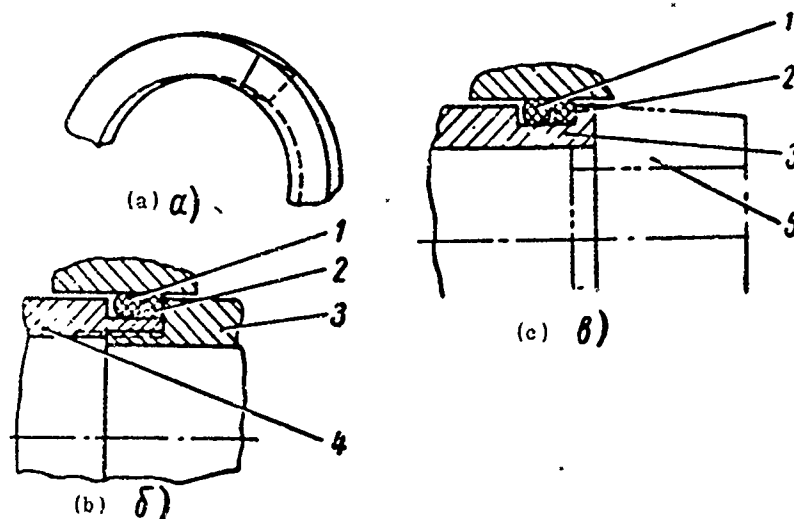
Methods of installing safety washers: a - cut teflon ring (with oblique cut); b - releasable connection; c - installation of guard ring by deforming it; 1 - seal ring; 2 - safety washer; 3 - rod; 4 - bushing; 5 - assembling ring.
